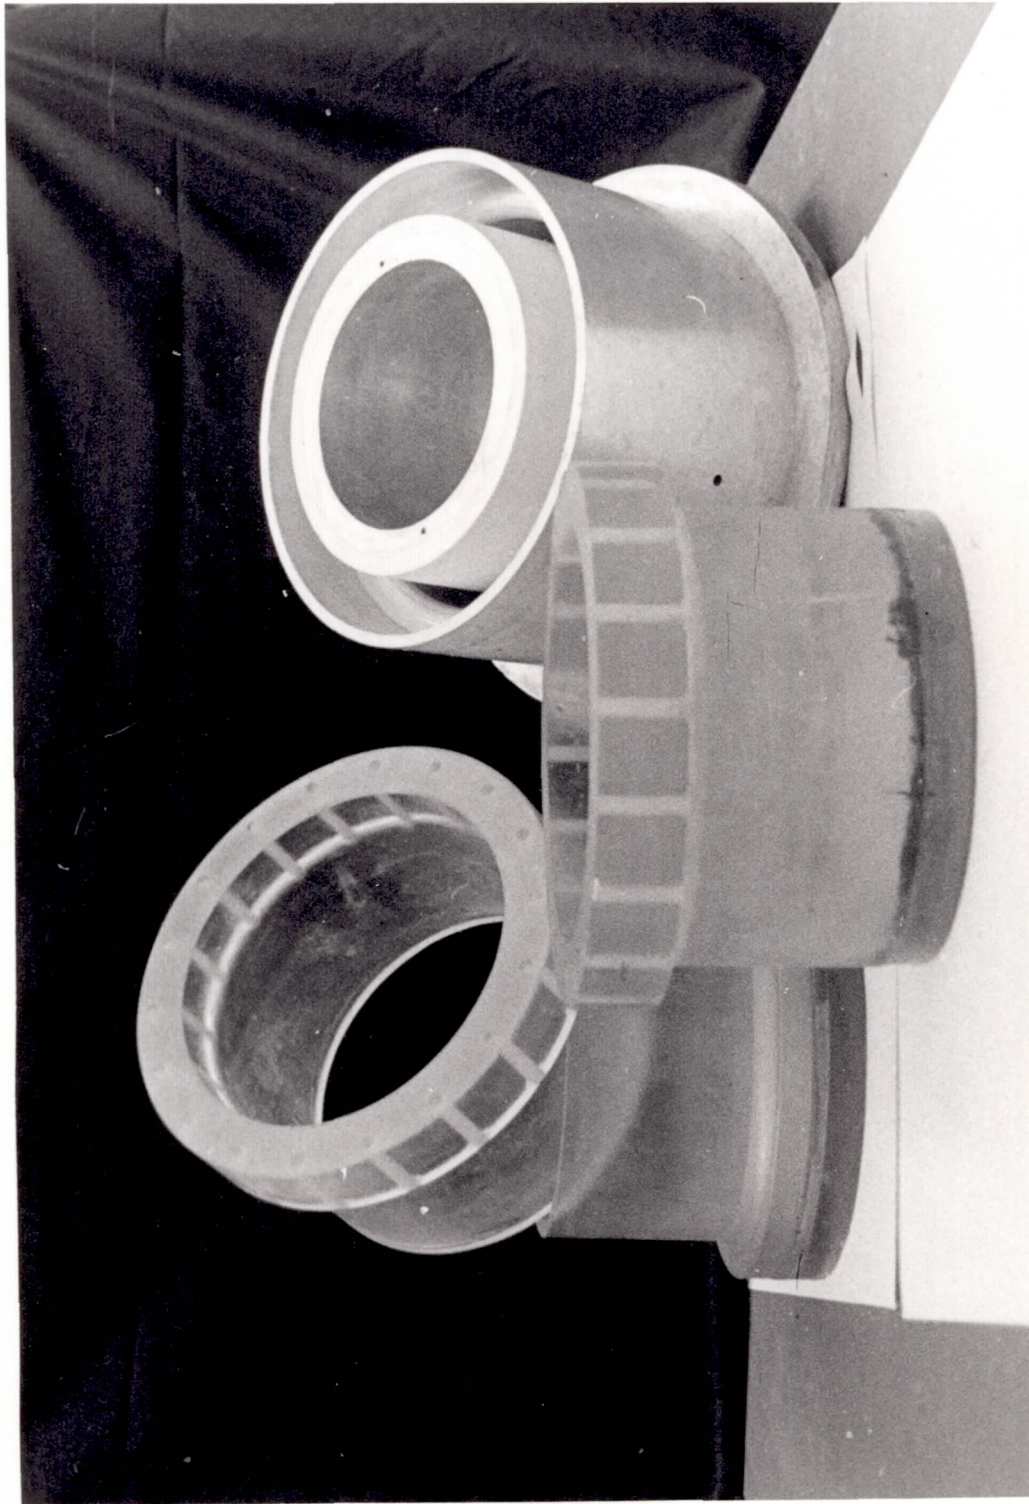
ASSEMBLED CASTING MOLD AND MACHINED CASTINGS
